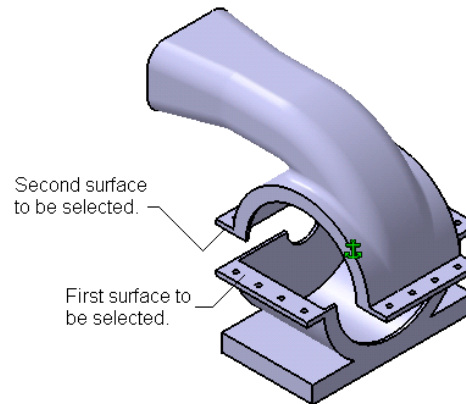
The surfaces to be selected to apply Contact constraint
